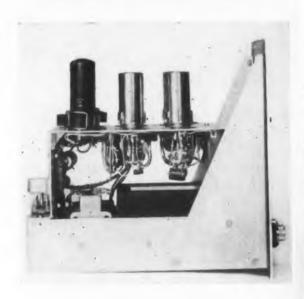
The oscillator subassembly. All components are readily accessible for servicing due to the use of turret sockets.
